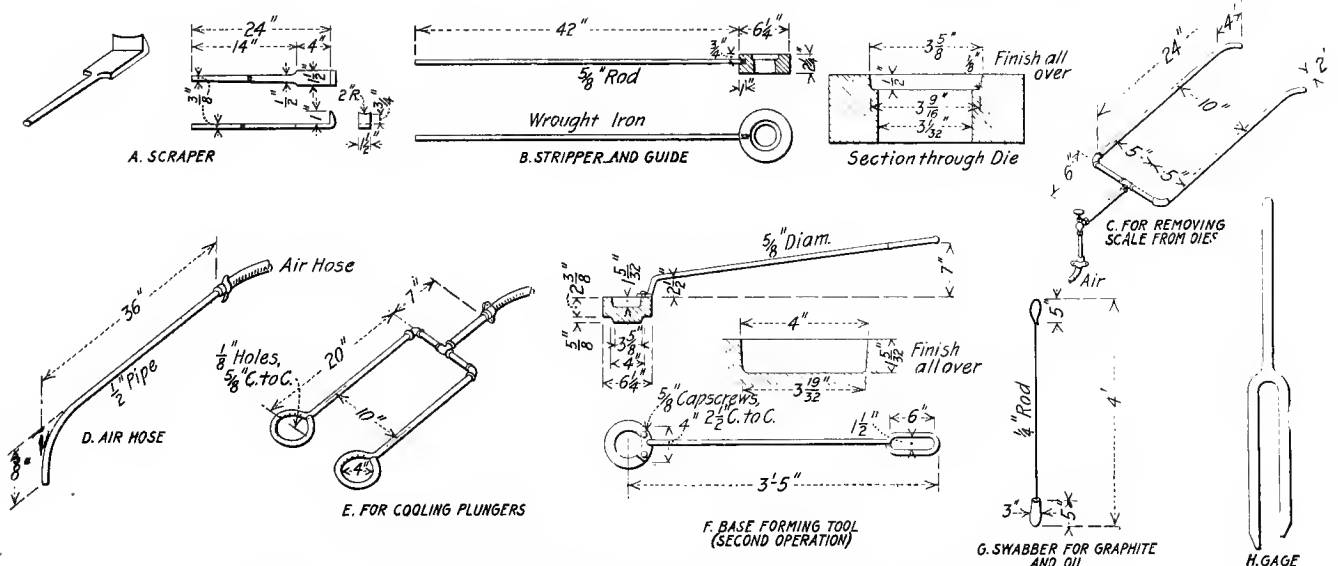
ACCESSORIES IN CONNECTION WITH HYDRAULIC FORGING PRESS
